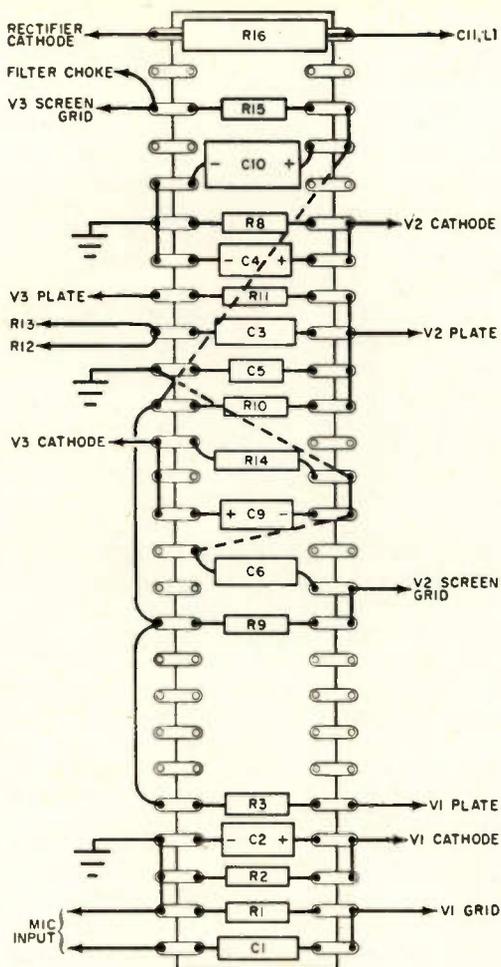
Use of a terminal board or tag strip speeds assembly and lends a neat, professional appearance.
